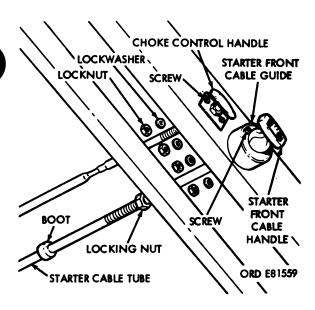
Starter cable tube-adjusting stop and locking nut.
